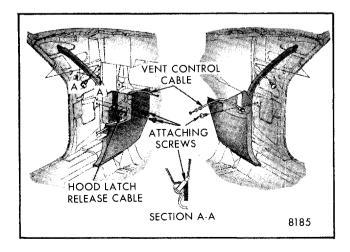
Shroud Side Finishing Panel - E Styles
